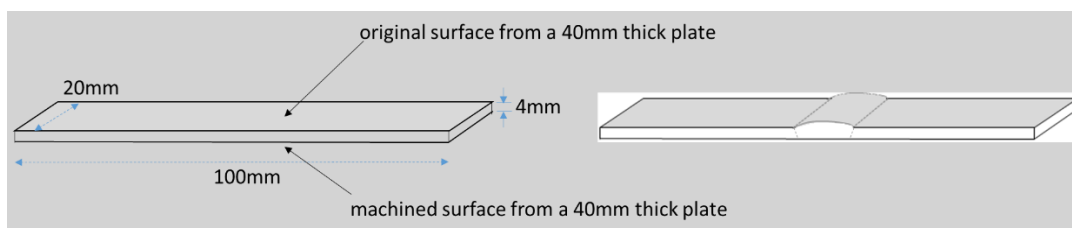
Four-point bend specimens (parent specimen and as-welded specimen)
